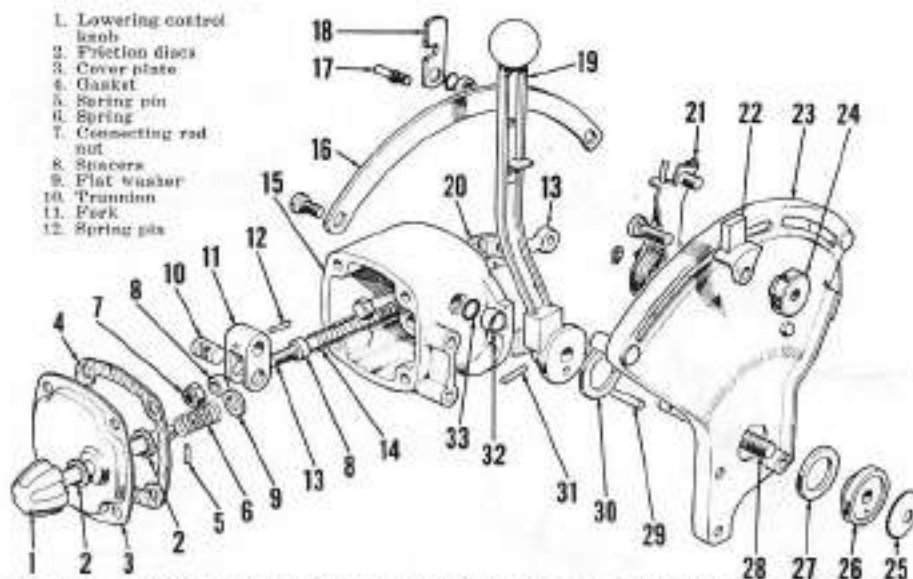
Exploded view of control lever housing assembly. Note that connecting rod (13) is also shown in exploded view of control mechanism (rockshaft right hand support bracket) housing. Refer also to assembly drawing in Fig. 206.
